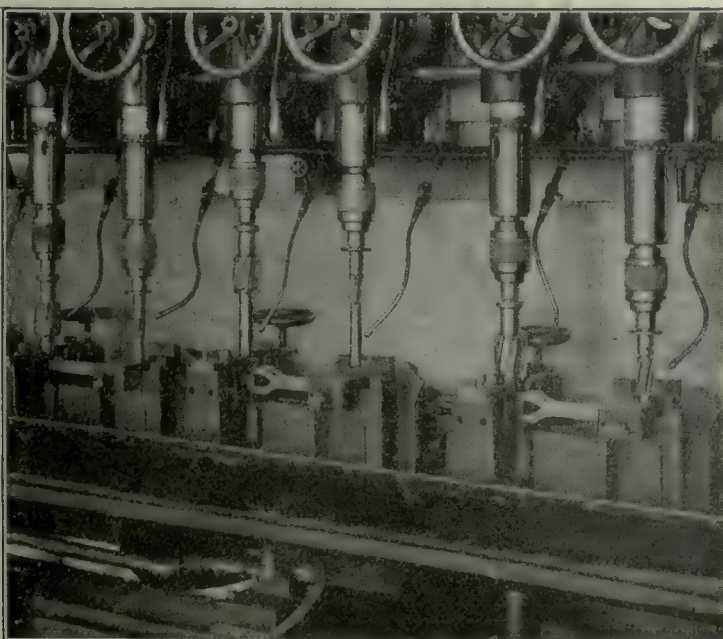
FINISH-REAM LARGE AND SMALL HOLES
